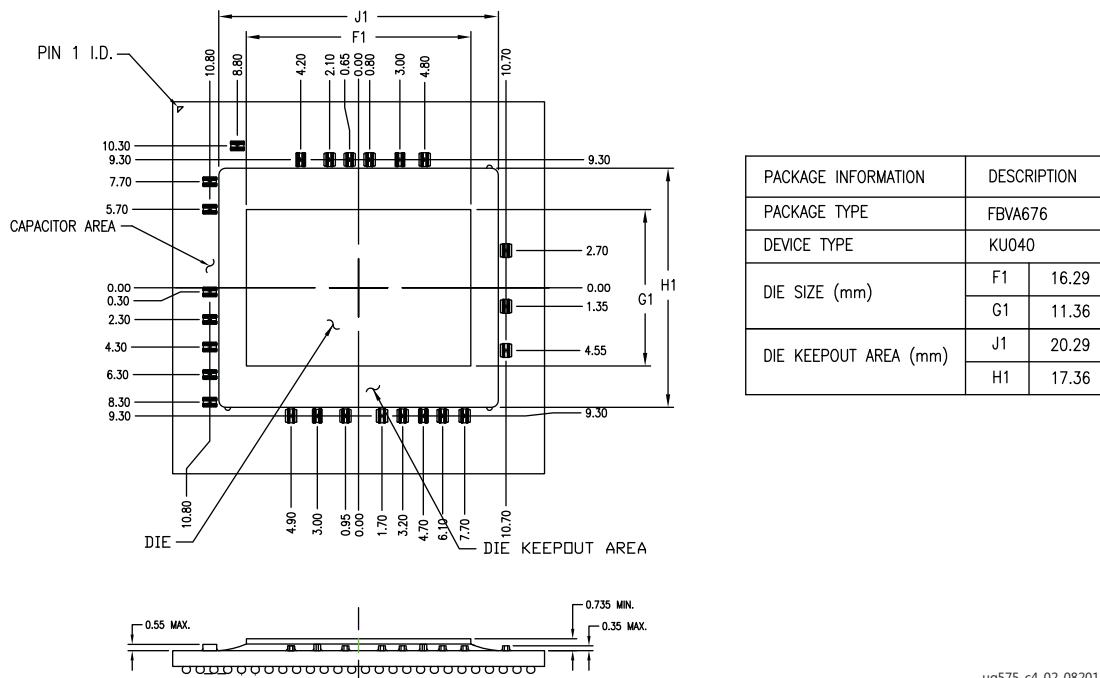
FBVA676 Package (XCKU035 and XCKU040) Die Dimensions with Capacitor Locations
